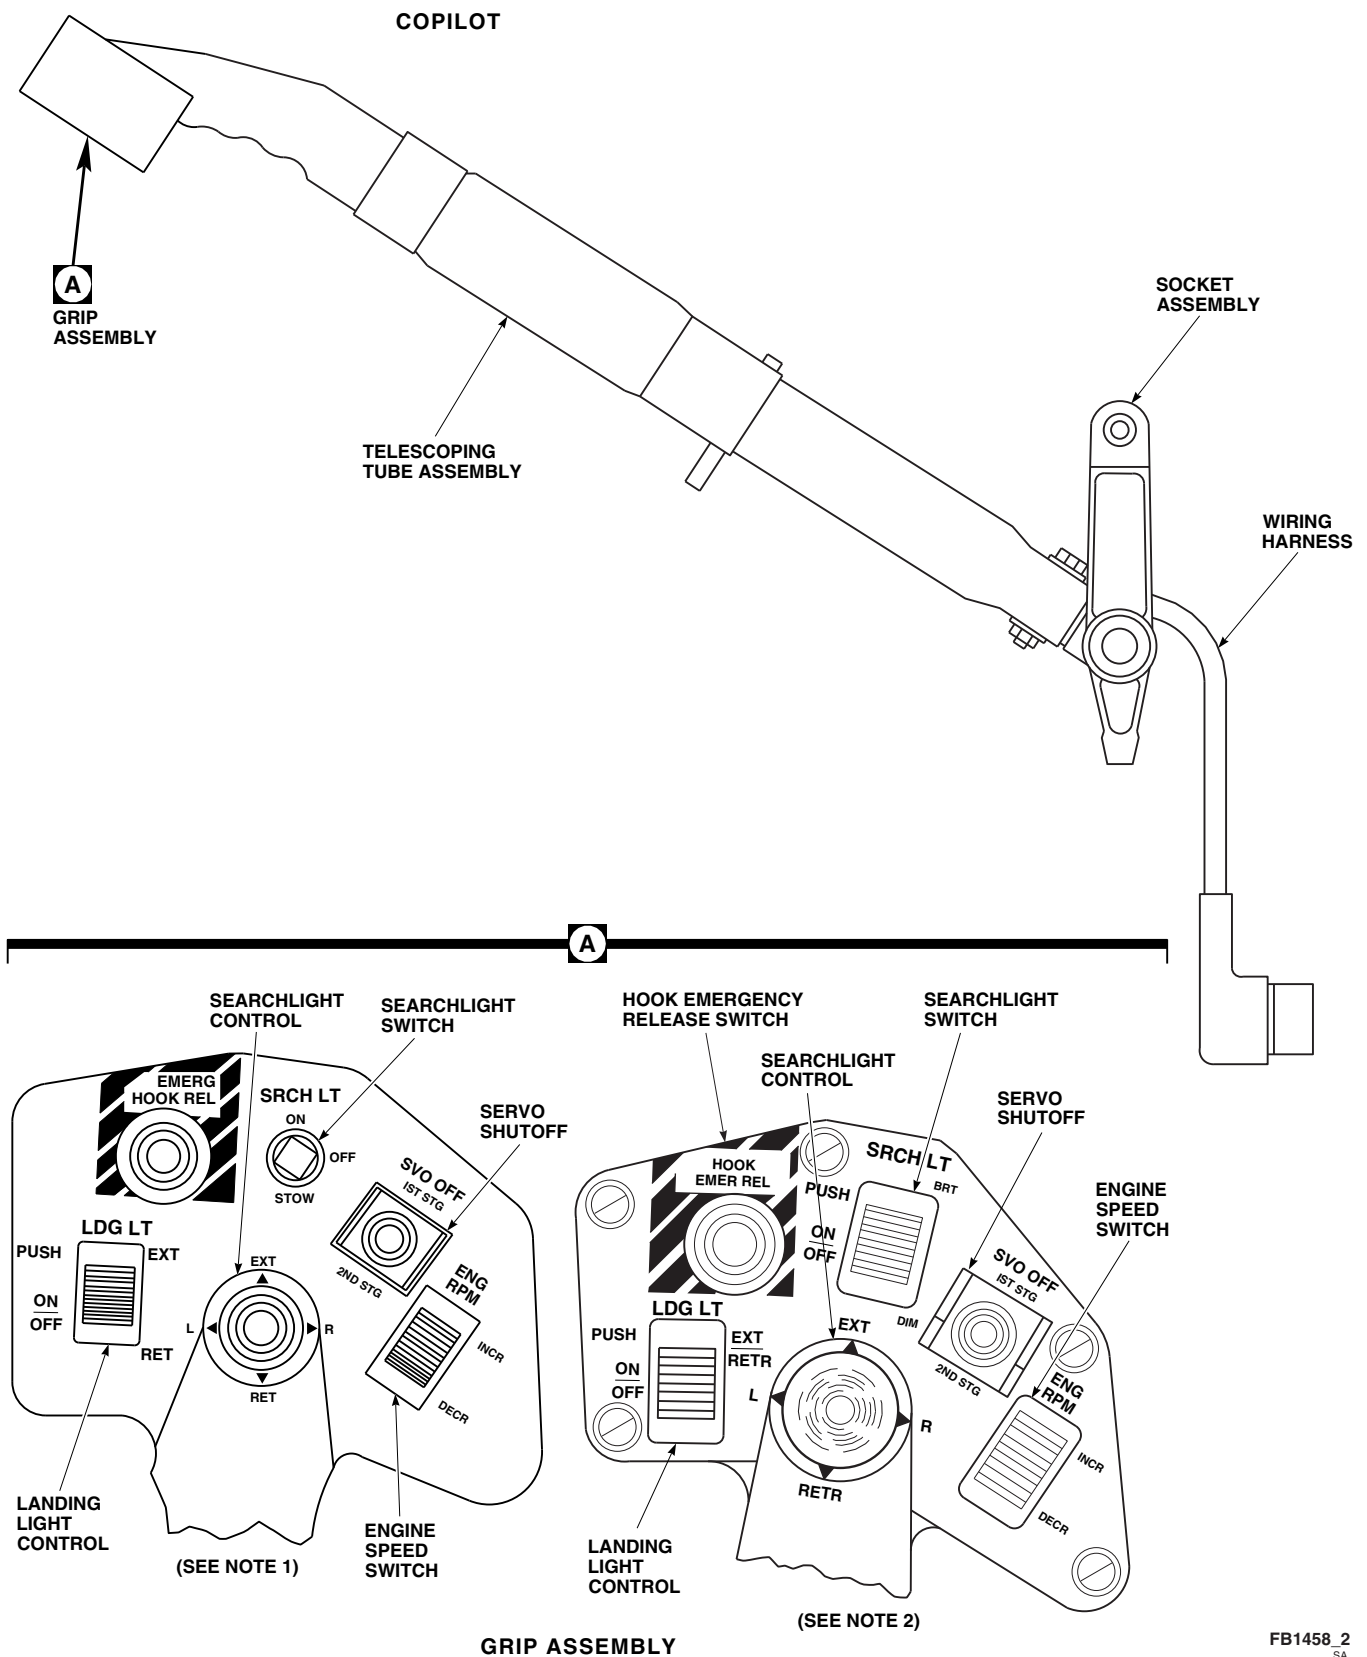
COLLECTIVE STICK ASSEMBLY (SHEET 2 OF 2)
